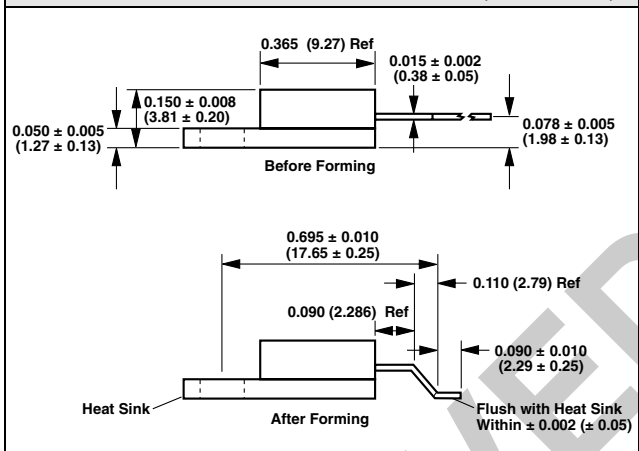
VPR221SZ DIMENSIONS in inches (millimeters)
